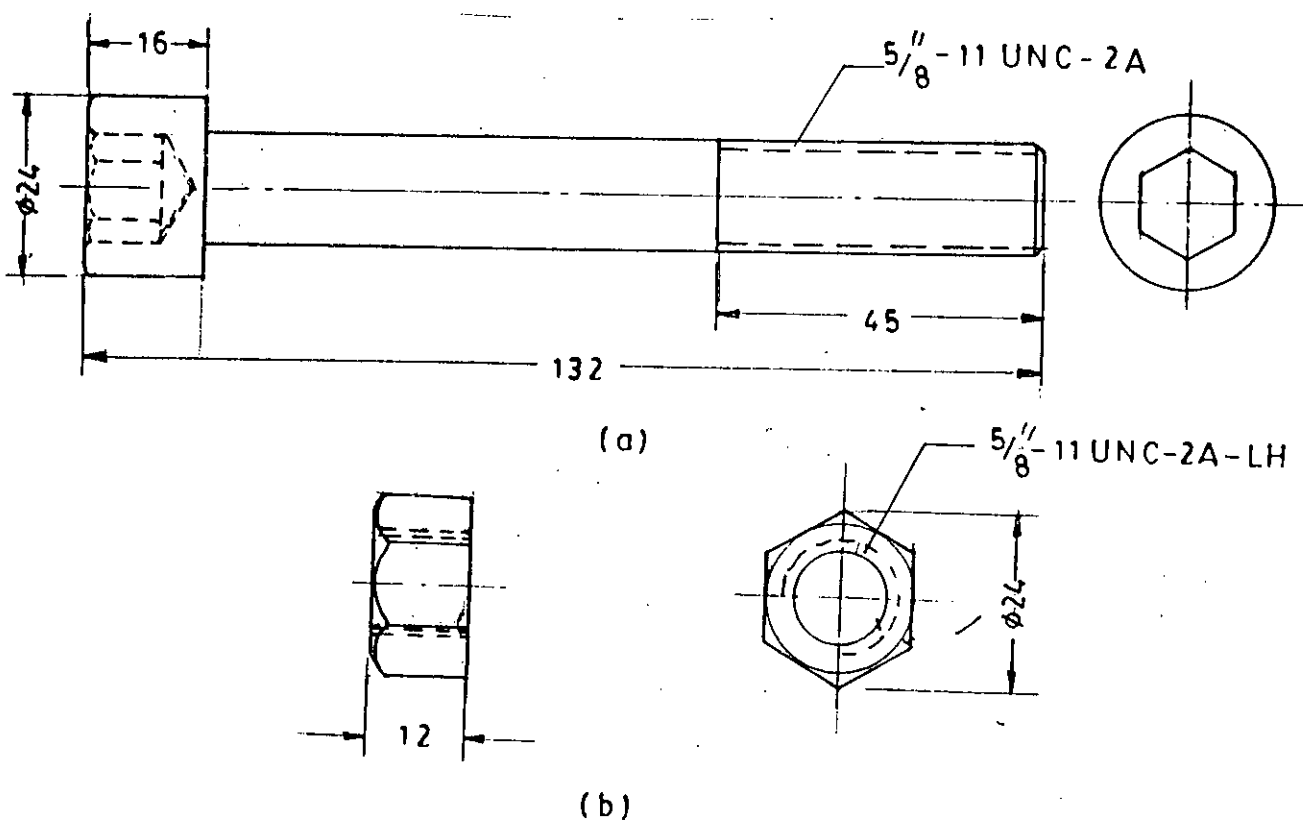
Sectional view of a) Allen Key Bolt and b) Nut.
